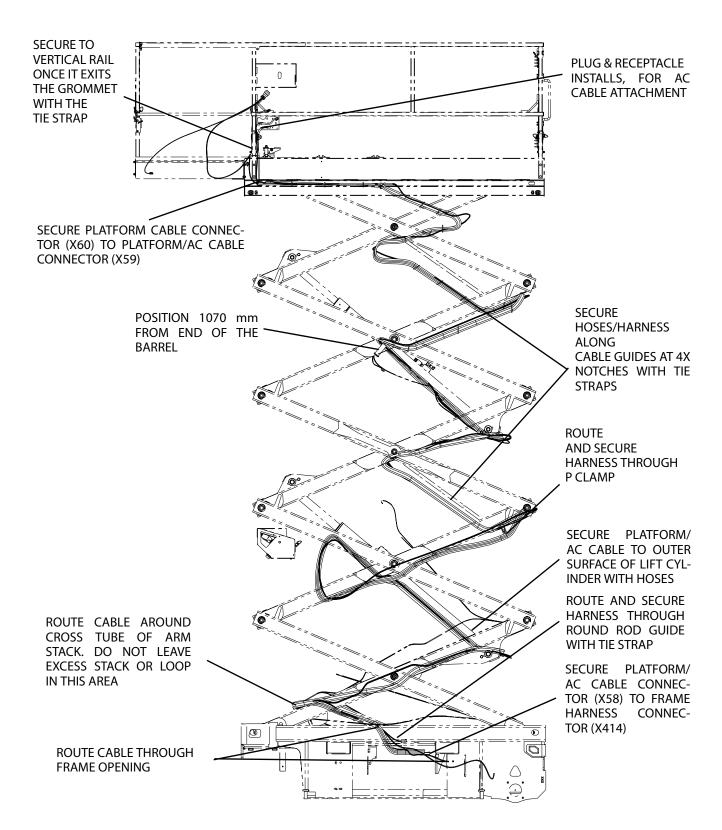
Scissor Arm Assembly - Cable Routing (FTSW)
